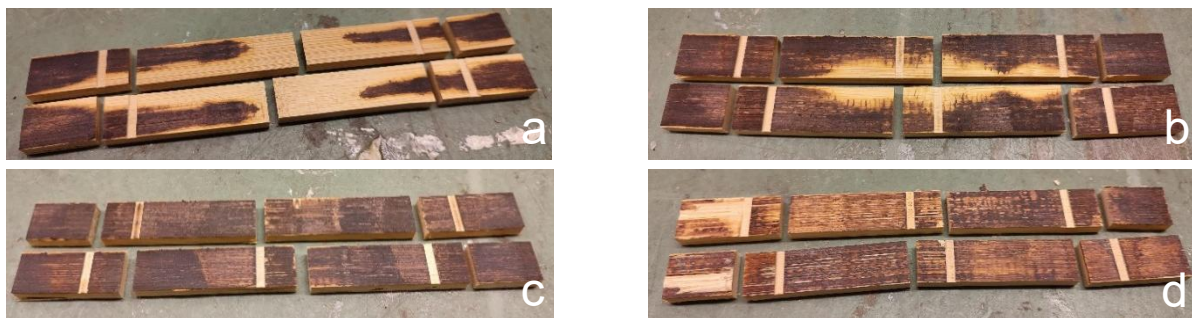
Welded interface (dark area) of four samples produced using welding conditions A3, C2, E2, and G1 corresponding to (a), (b), (c) and (d) respectively. Each specimen contains three isolated welded areas (one in the middle and two near the edges) subjected to tensile-shear testing
